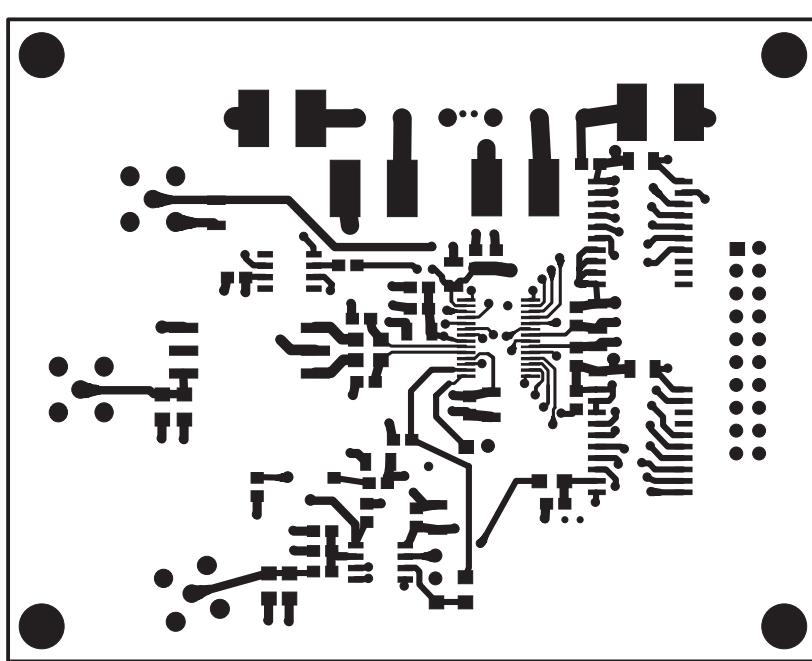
MAX1425 EV Kit PC Board Layout—Layer 1
